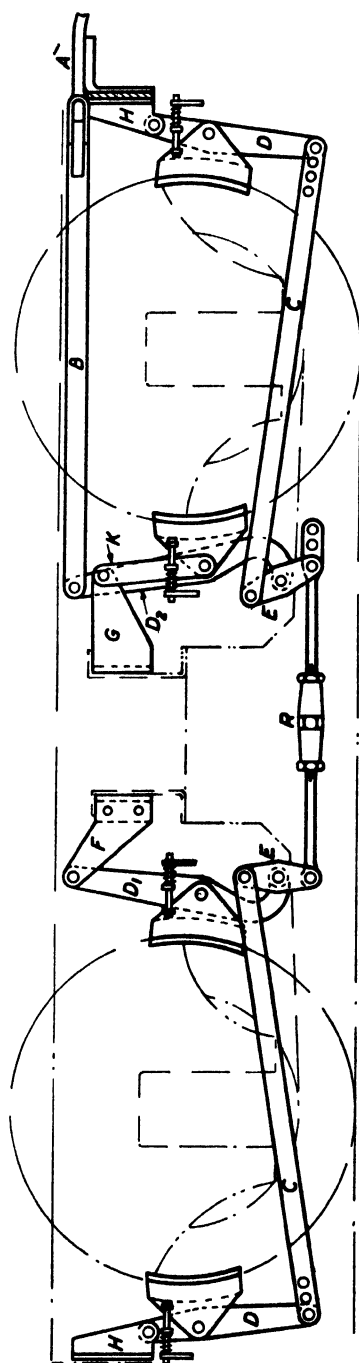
B. DIAGRAM OF BRAKE-RIGGING FOR TWO BRAKE SHOES (WITHOUT BRAKE-BEAMS) TO EACH WHEEL
